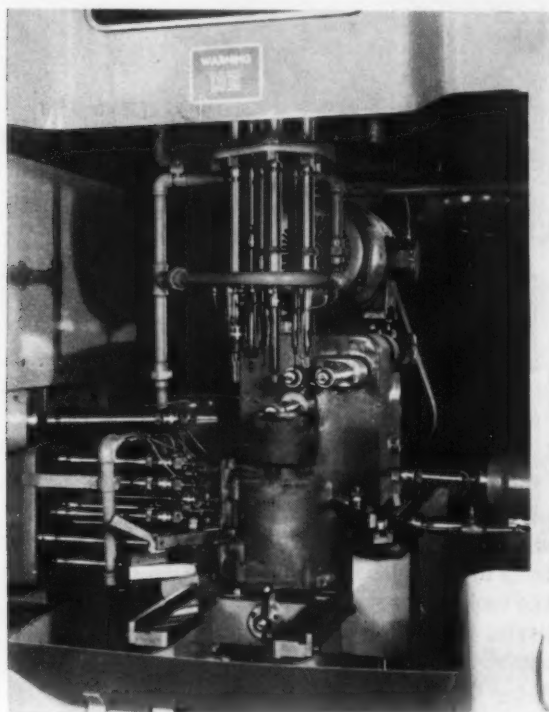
This 31-spindle machine taps 29 holes in the transmission case. Each spindle has a safety device to prevent damage in case a tap hits an obstruction in the hole.
